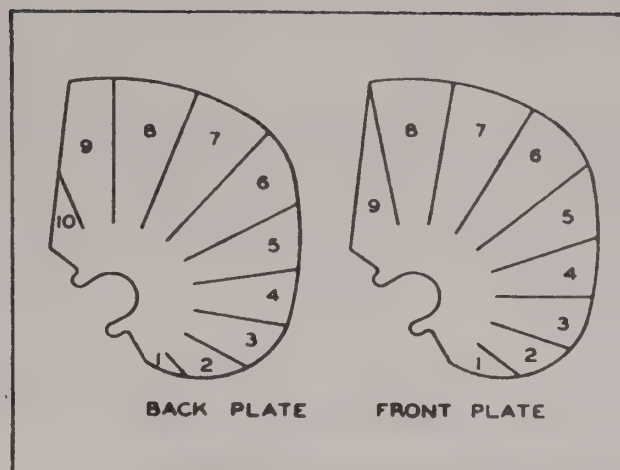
Radio Transmitter T-217A/GR, Driver Unit, Tuner Capacitor Sectors
